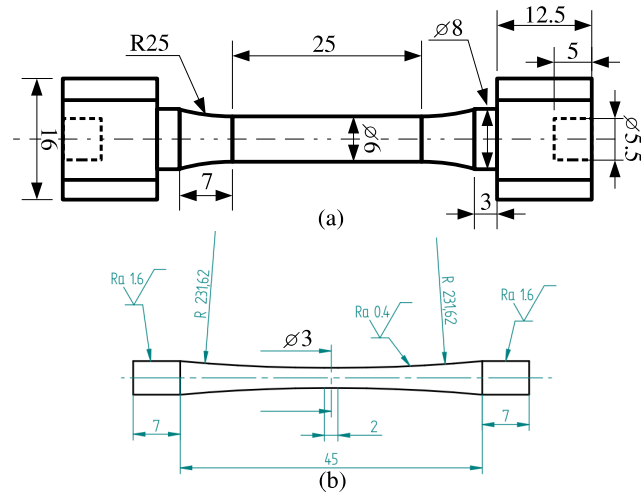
(a) Geometry of the macroscopic torsion specimens. Dimensions are in millimetres. (b) Geometry of the tomography specimens.
